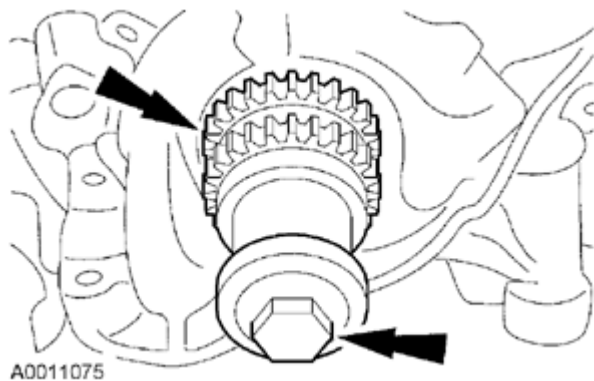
Locating Crankshaft Pulley Bolt And Crankshaft Sprocket
